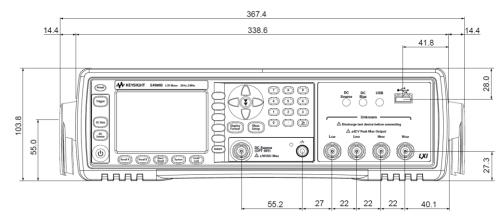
Dimensions (front view, with handle and bumper, in millimeters, nominal)
